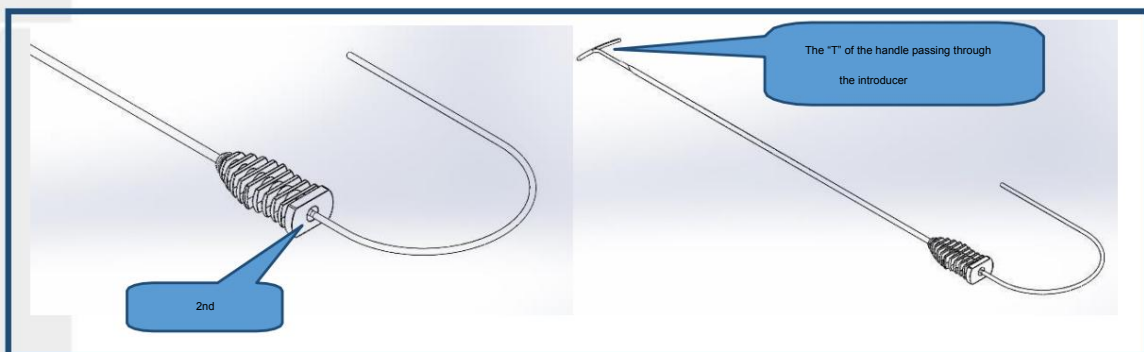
Illustration of the process of inserting the Go Up Handle into the Introducer up to the second marking.
